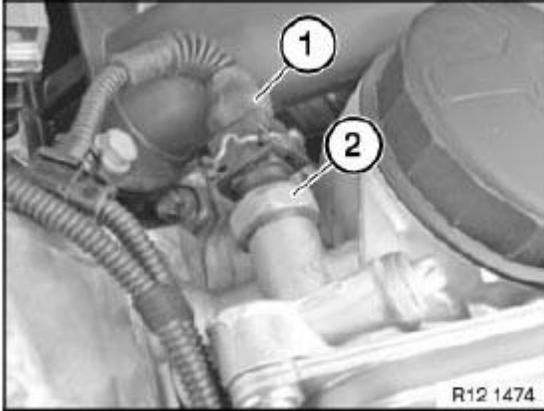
Identifying Oil Pressure Switch And Plug Connection
